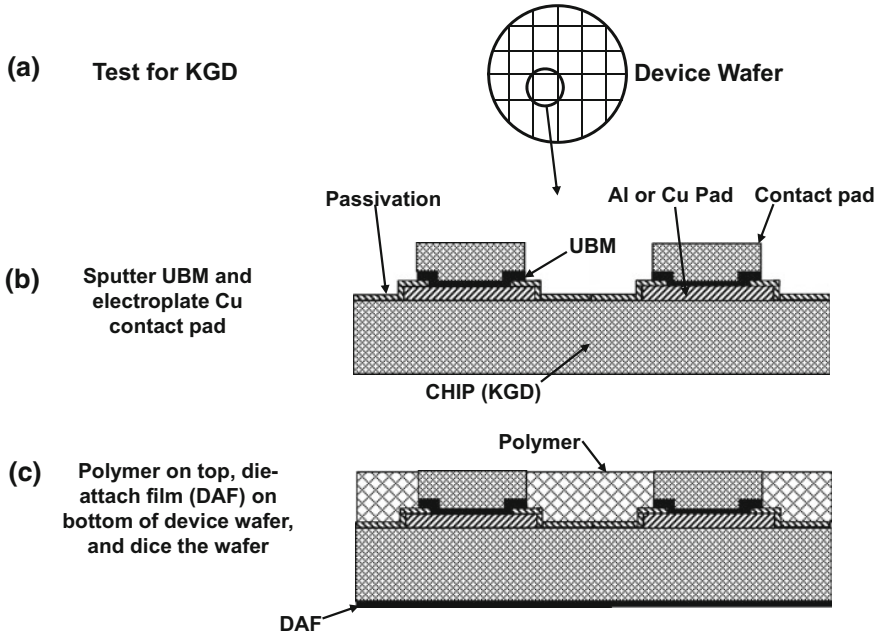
Manufacturing process for packaging the application processor chipset
